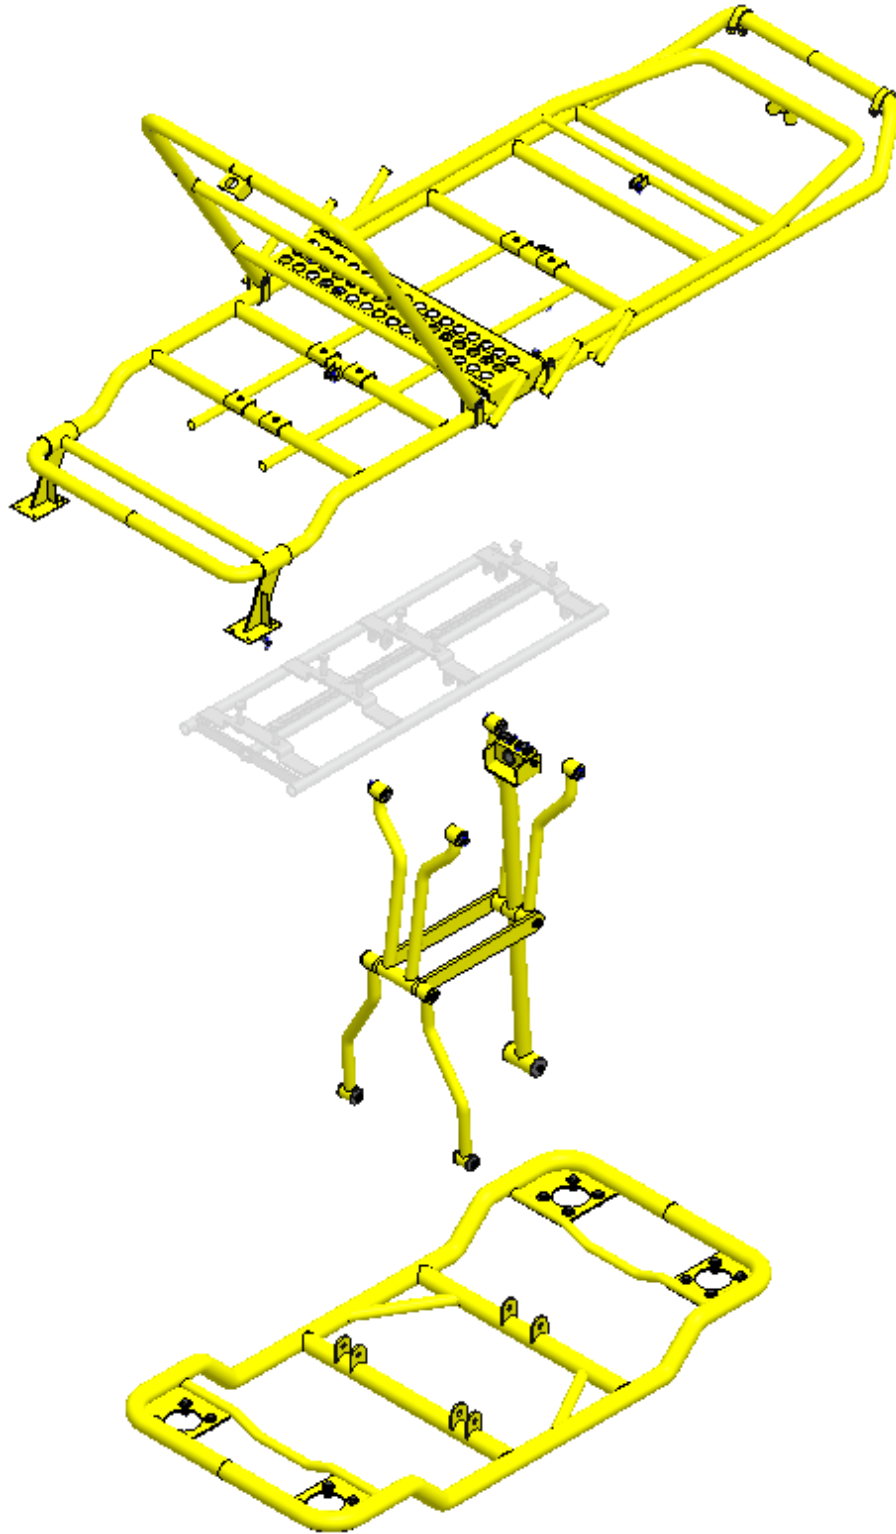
Exploded View of the Stretcher's Aluminum Frame.
